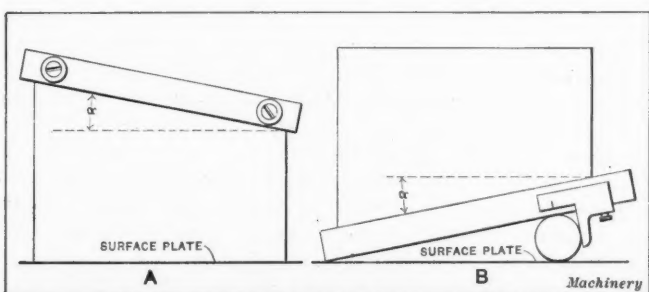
(A) Testing Angle by Means of Sine-bar. (B) Quicker Method of testing Same Piece
